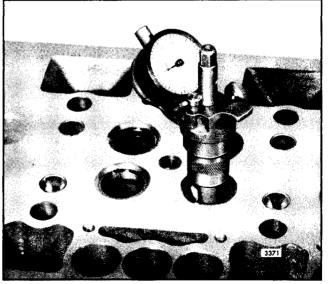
Checking Relative Concentricity at Valve Seat Insert with Relation to Valve Guide
